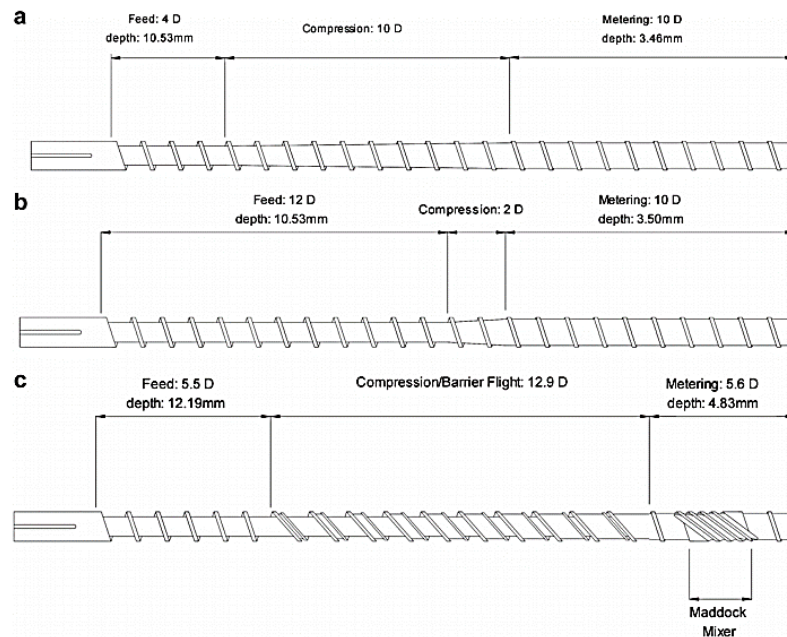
Types of screws: a) Single flighted, tapered compression. b) Single flighted, stepped compression, c) Barrier flighted with spiral mixer [10].
